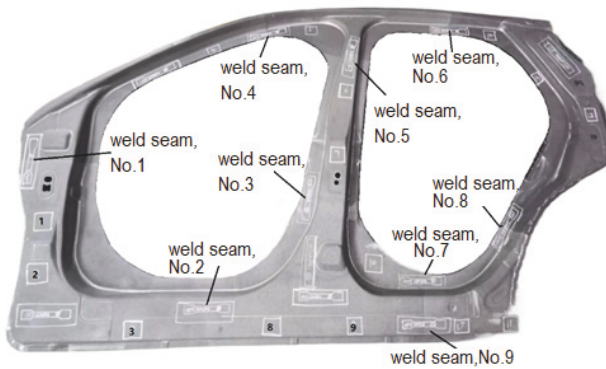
Weld sampling locations and numbers of hot stamped door ring components (photo)
